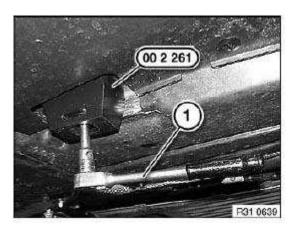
Identifying Special Tool (00 2 261) Courtesy of BMW OF NORTH AMERICA, INC.
